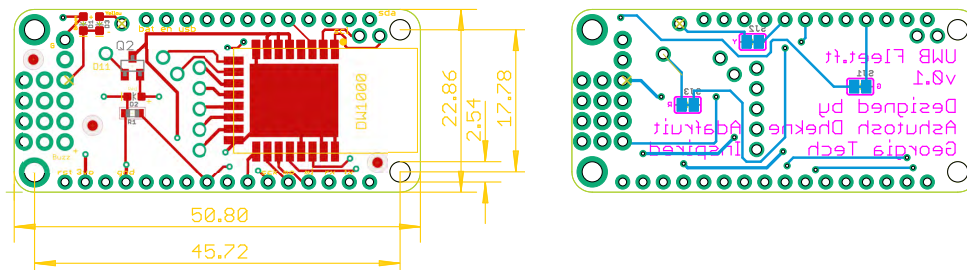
Dimensions of our design and a blueprint of the front and back of the designed PCB
